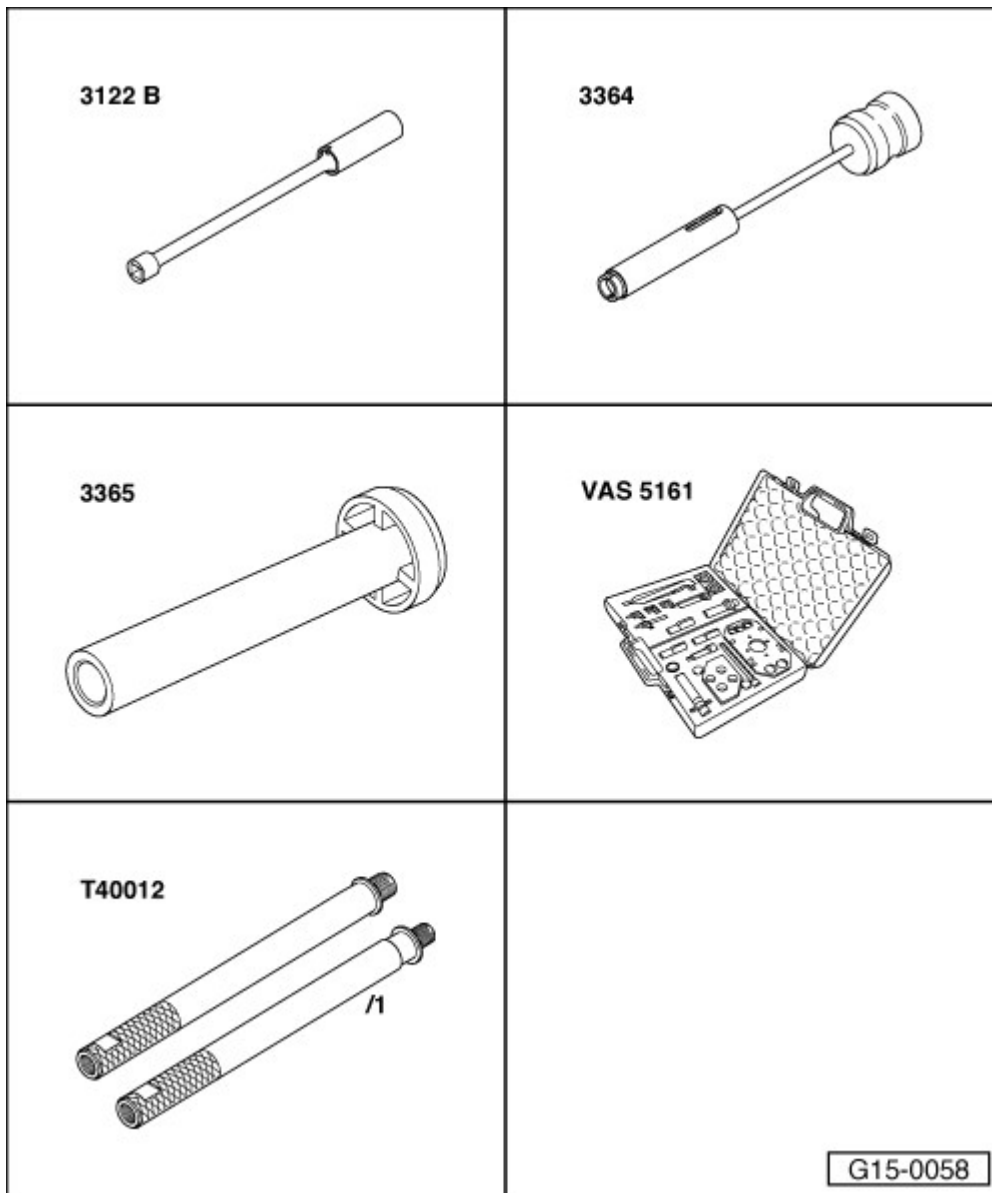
Identifying Special Tools -- Valve Stem Seals, Cylinder Head Installed, Replacing
